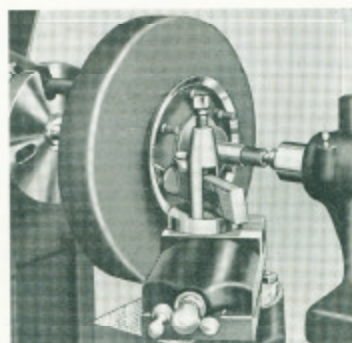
Facing a flange on a Buffalo wheel which is mounted on a taper mandrel between centers of the lathe.
